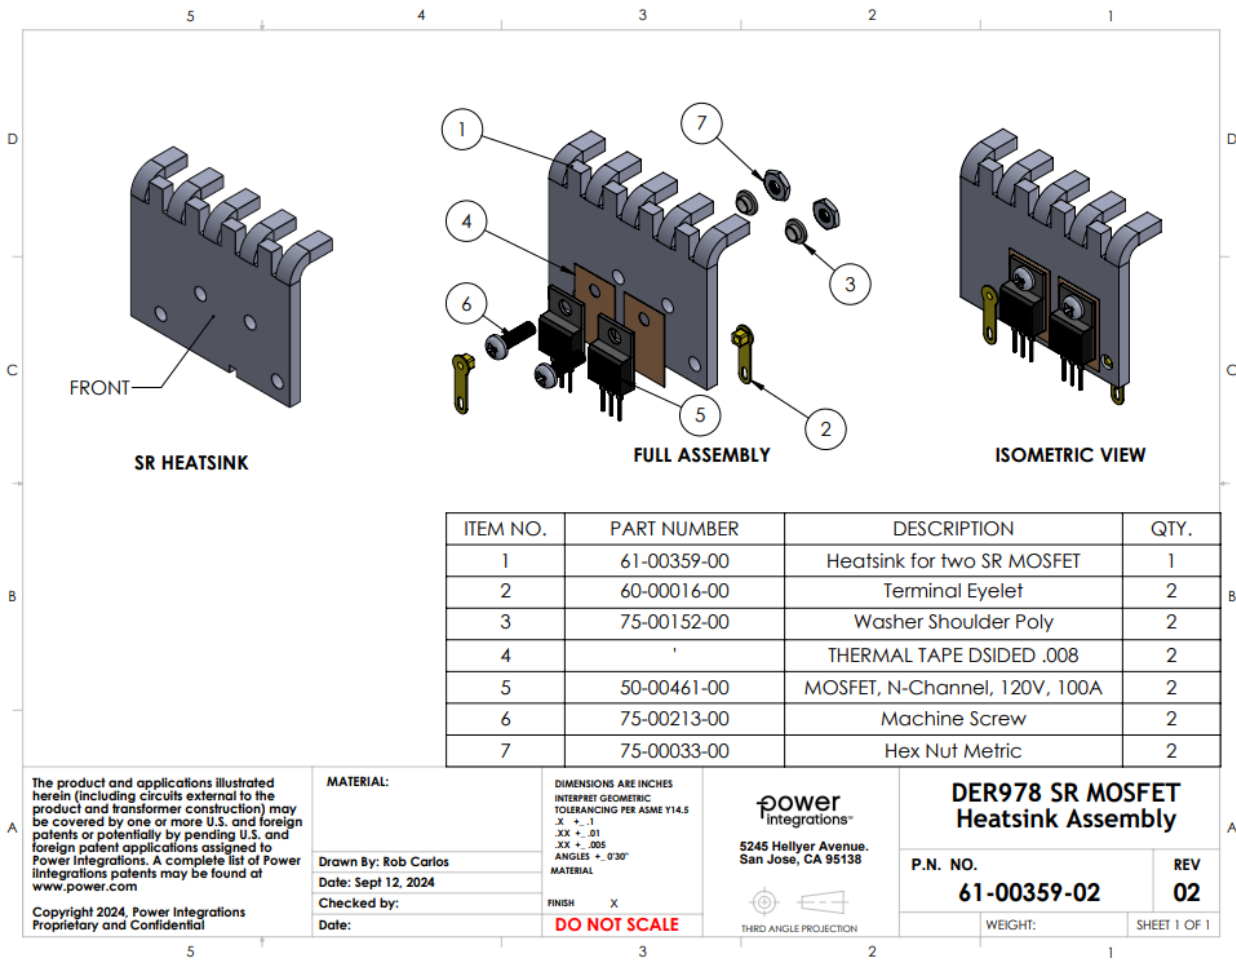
SR MOSFET Heatsink Assembly Drawing.
